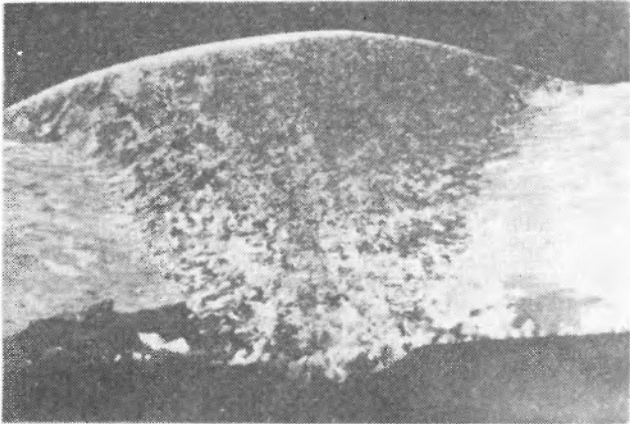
Typical macrophotograph of sound weld, x5.
